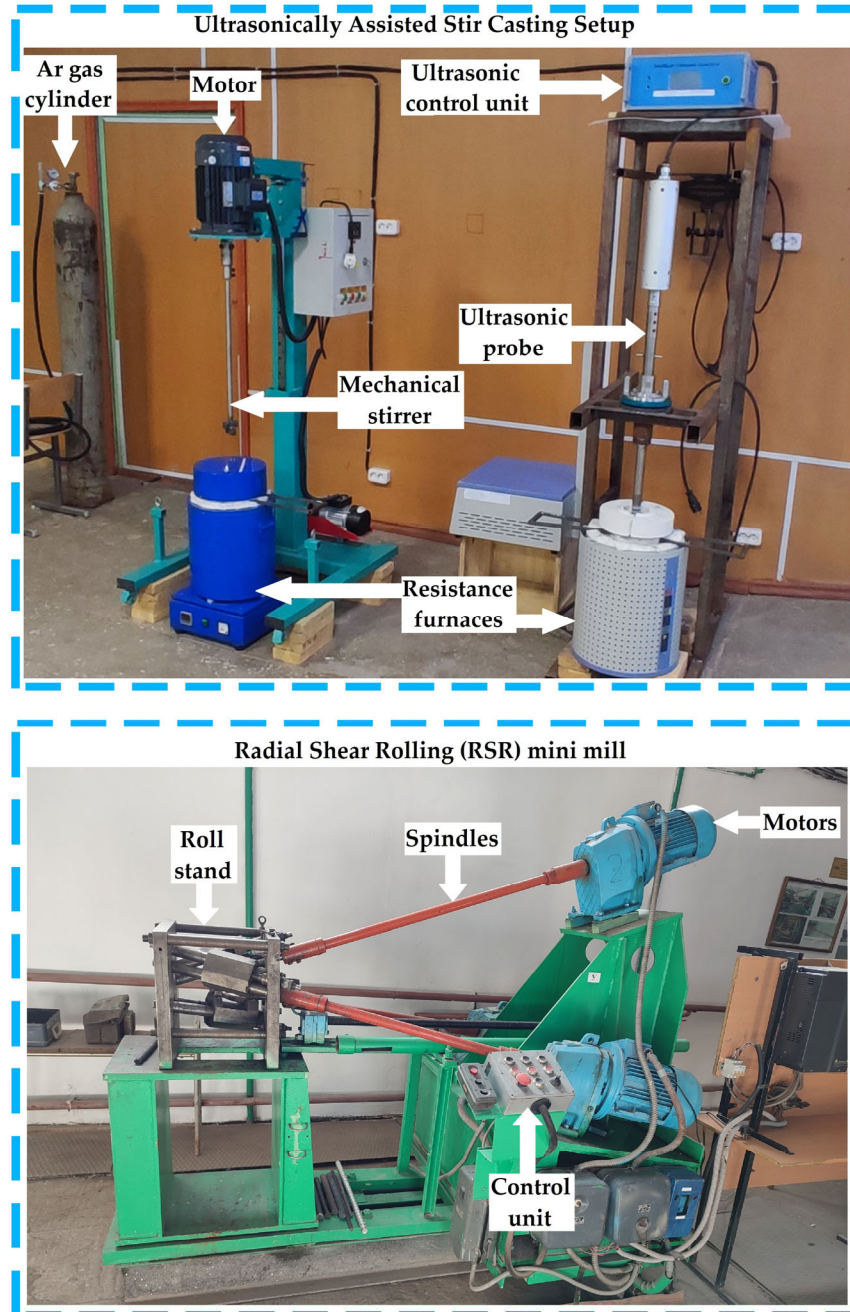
Experimental facilities: ultrasonically assisted stir casting setup and radial-shear rolling (RSR) mini mill employed in this study.
